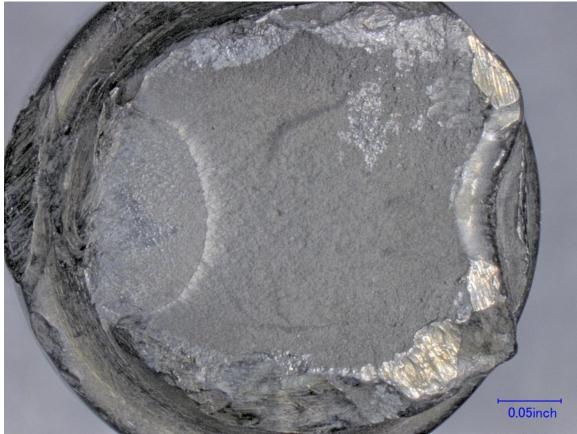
The fracture surface of the broken rod bolt from the #2 connecting rod.
